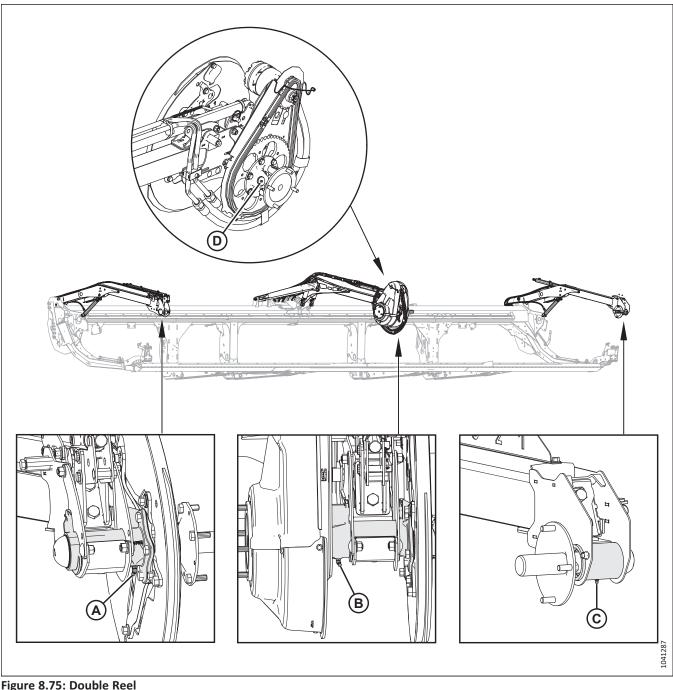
Double Reel A - Reel Right Bearing (One Place) D - Reel U-joint (One Place)¹⁰
